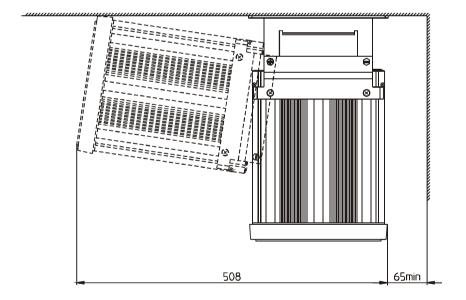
Surface mounting, casing able to swing to the left, rear connections. Size N1 casing
